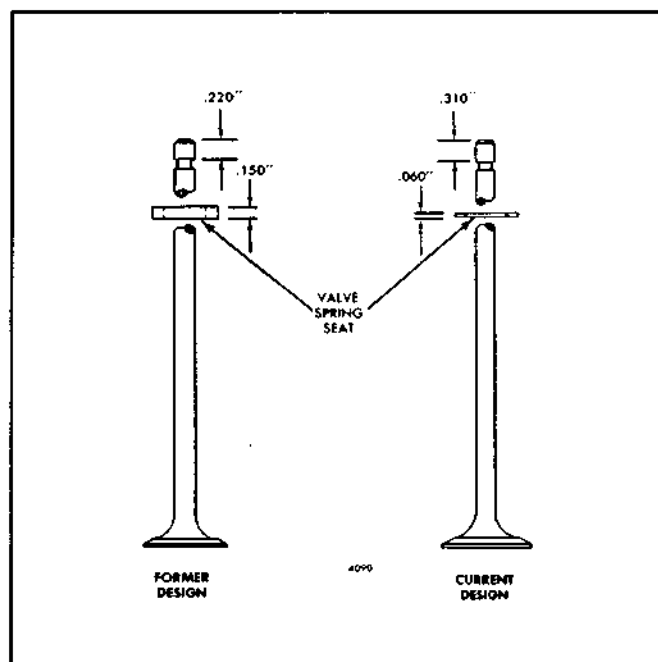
Former and Current Design Exhaust Valves (Four Valve Head)
